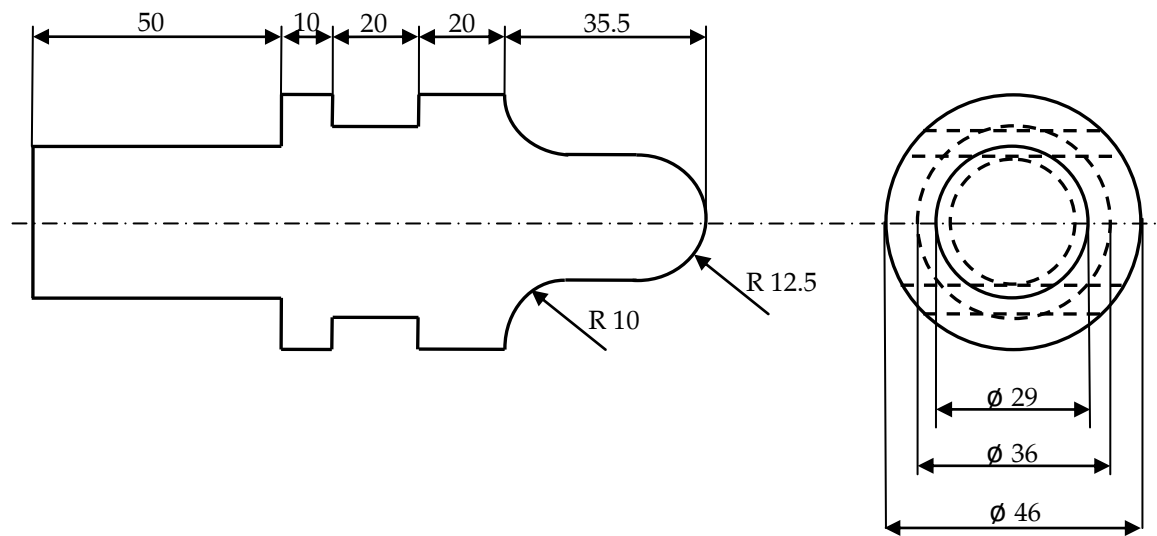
Technical drawing of the connection bar with all dimensions in mm.
